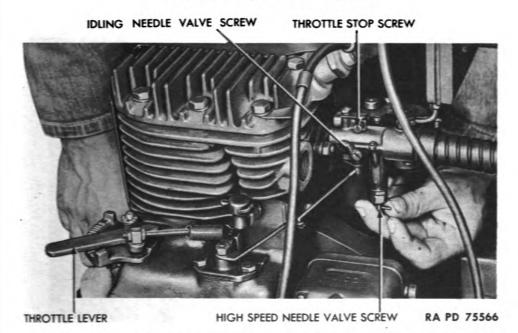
Adjusting Steam Generating Plant Engine Carburetor
